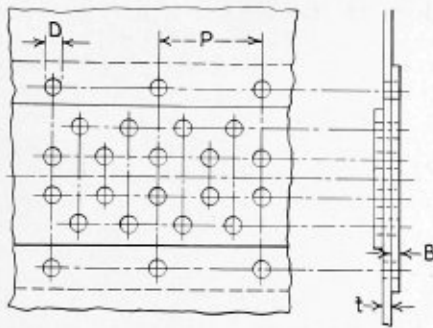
Triple-riveted butt joint with inside and outside welts
